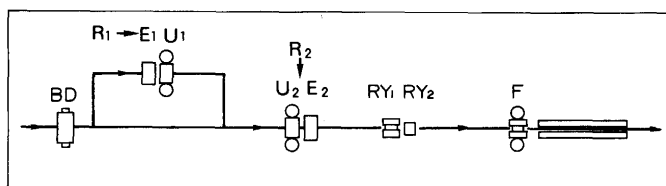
The layout of Fukuyama Works No.1 Large Shape Mill, (BD:Break down mill, R₁:No.1 roughing mill, R₂:No.2 roughing mill, U₁, U₂: Universal mill, E₁, E₂:Edger, RY₁, RY₂:Web widening mill, F:Finishing universal mill).
